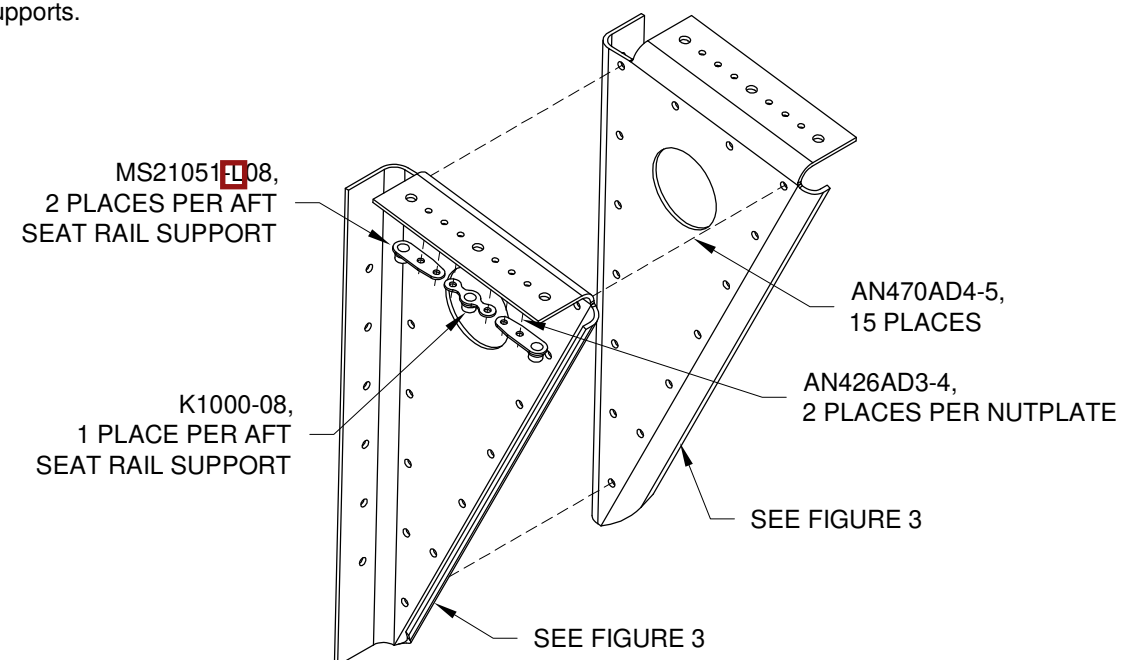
TYPICAL AFT SEAT RAIL SUPPORT SUBASSEMBLY
